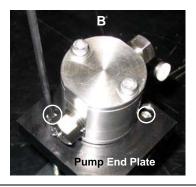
Removing the Pump PC Board and End Plate Bolts
